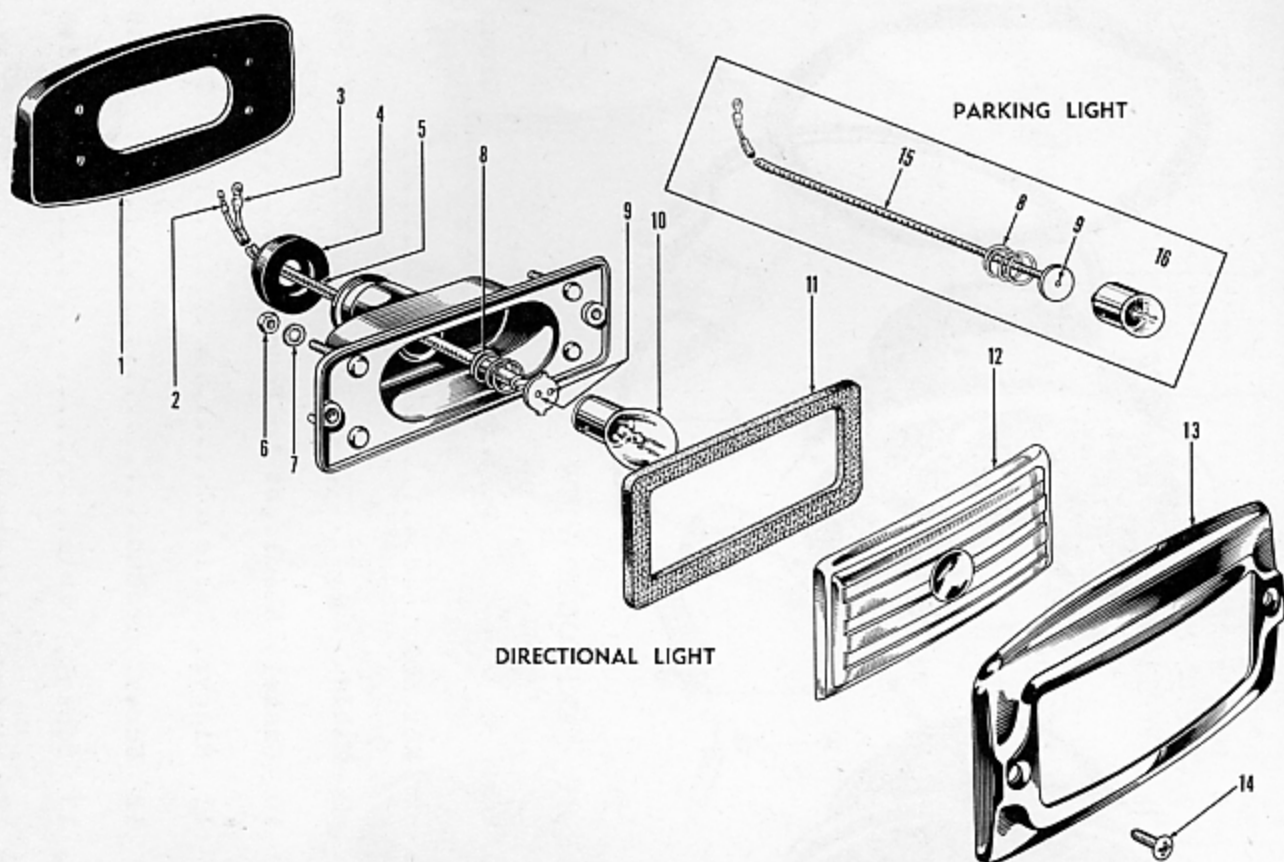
PARKING AND DIRECTIONAL LIGHT - EXPLODED VIEW
